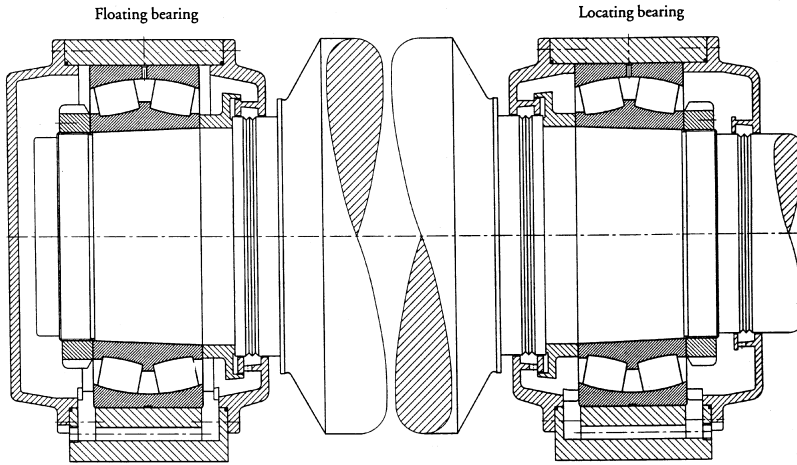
Guide roll for paper mill (from FAG, 1998, with permission of FAG OEM and Handel AG).
